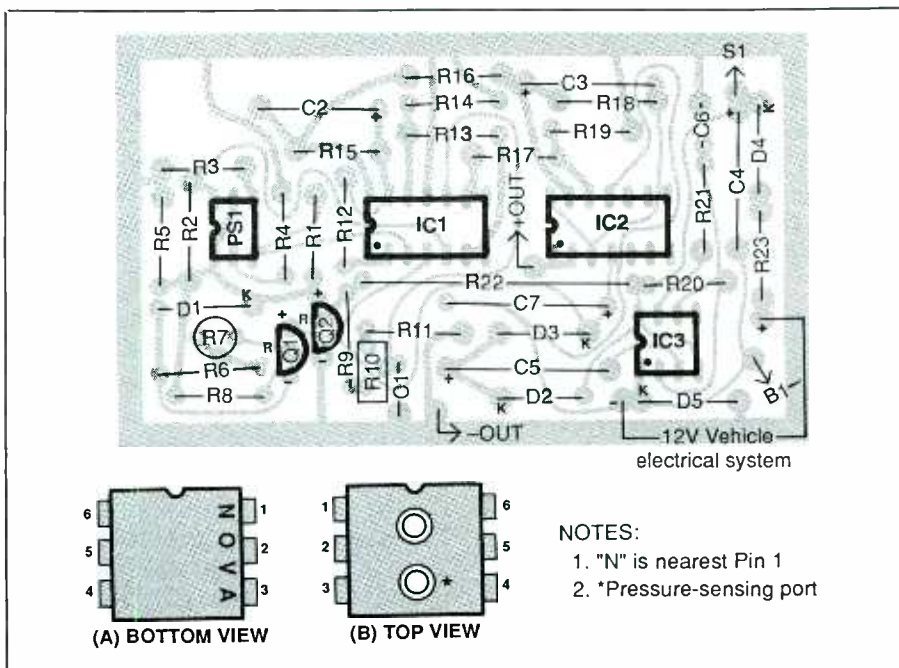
Wiring guide for pc board and pinouts for sensor. Use this as a general layout guide if you wire project on perforated board.
